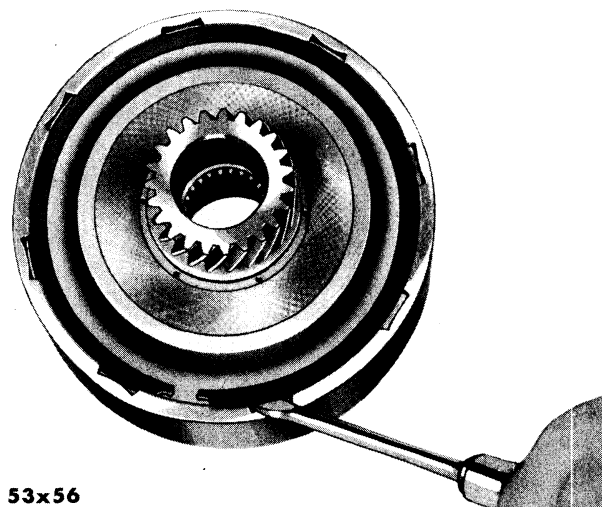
Removal or Installation of Kickdown Sun Gear Snap Ring
